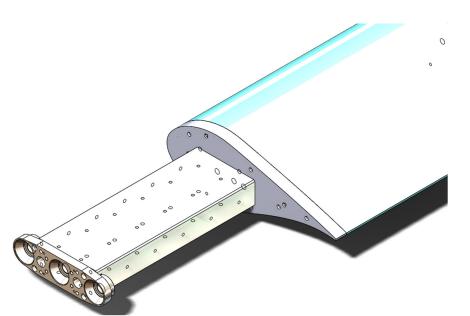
A beam connected to an existing airfoil to connect to the turntable in the test section. An airfoil shaped bodywork will be mounted on the beam.
